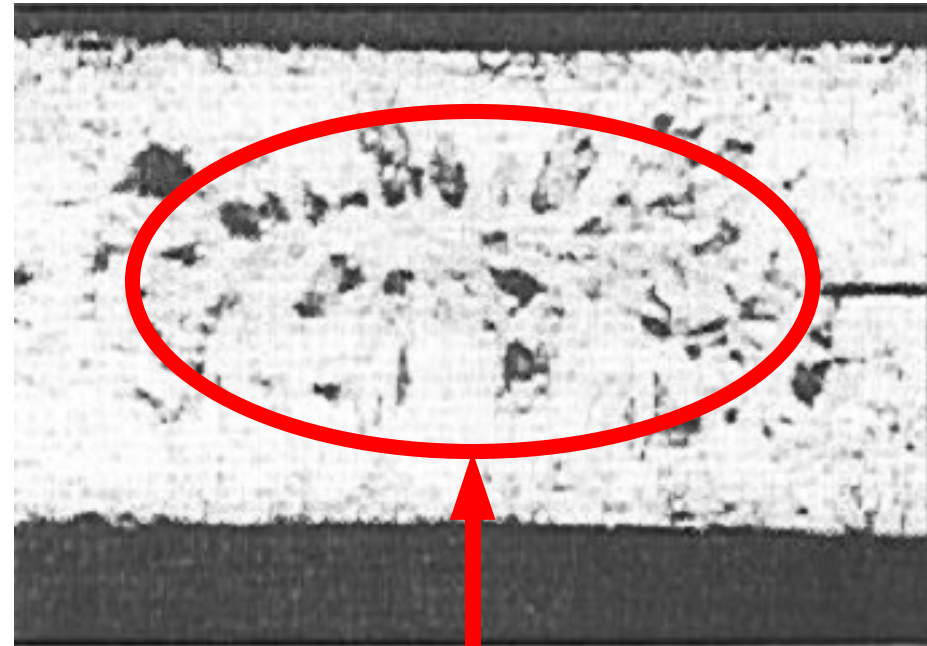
FUSION WELD (MAGNIFICATION 100X)
